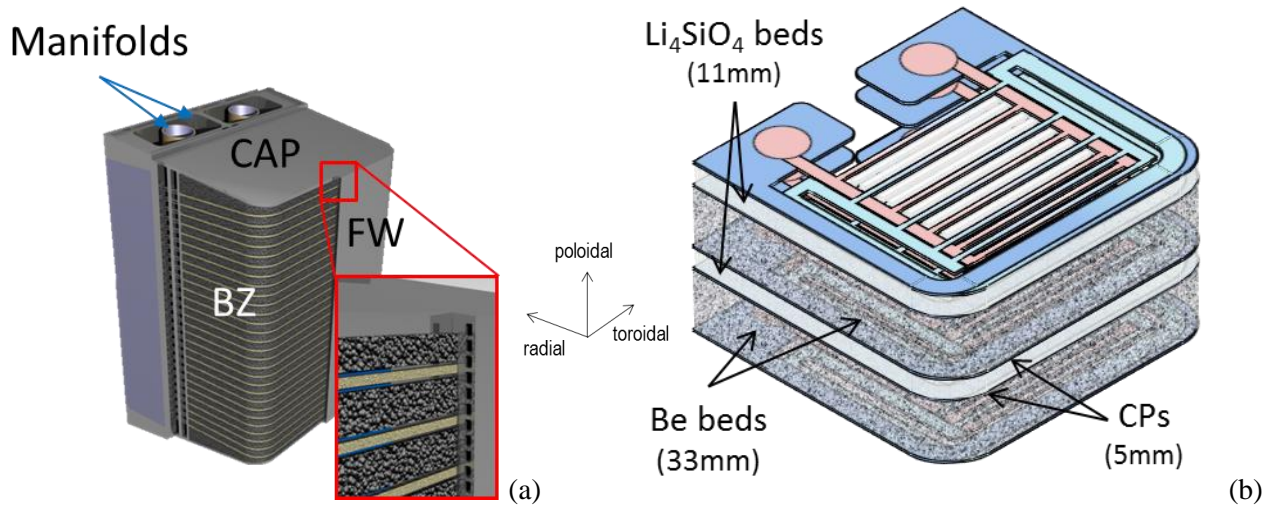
a) CAD drawing of the OB4 BM, showing the detail of the FW and BZ in the inset; b) detail of the BZ: the thickness of the different layers is reported in the brackets. Adapted from [13].
